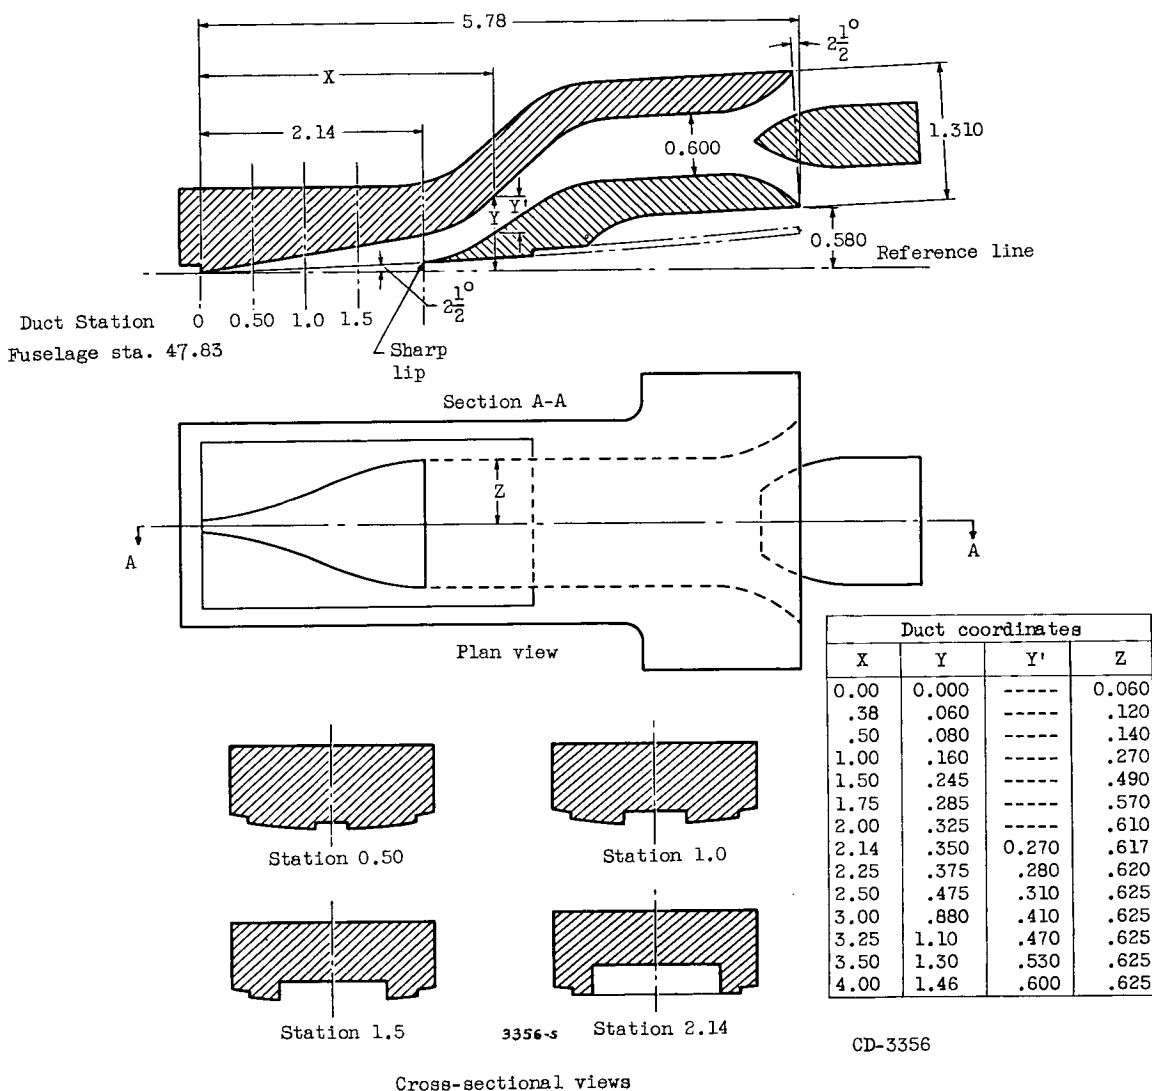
Submerged inlet details. (All dimensions are in inches.)
